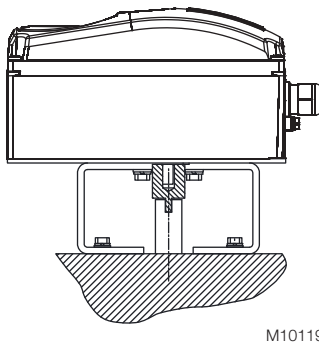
Mounting to rotary actuators to VDI/VDE 3845
